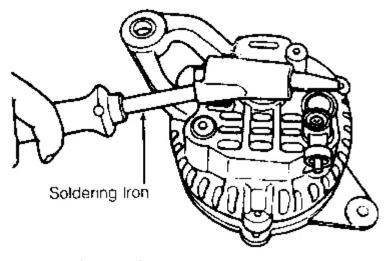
Testing Generator Stator, Rotor & Brushes (5 Of 5) Courtesy of MAZDA MOTORS CORP.
